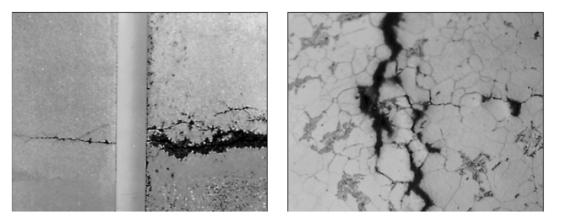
Stress Corrosion Cracks Adjacent to Welds. Carbon steel test specimens exposed to calcium-ammonium nitrate fertilizer solution at 140°F. Note intergranular pattern of cracks. Magnification of left photograph is 1.5X; right is 500X.
